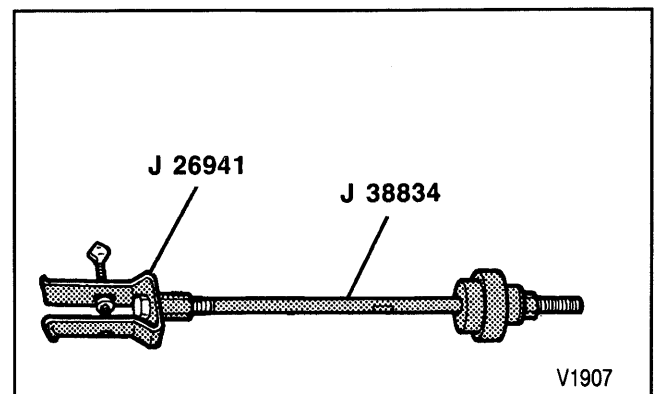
J 38834 Positioned to Remove Balance Shaft Rear Bearing
